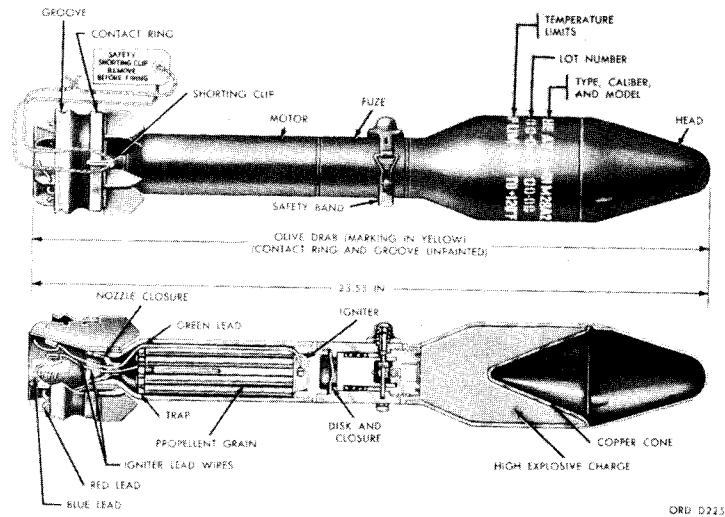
Rocket, high explosive, 3.5-inch: AT, M28A2.
